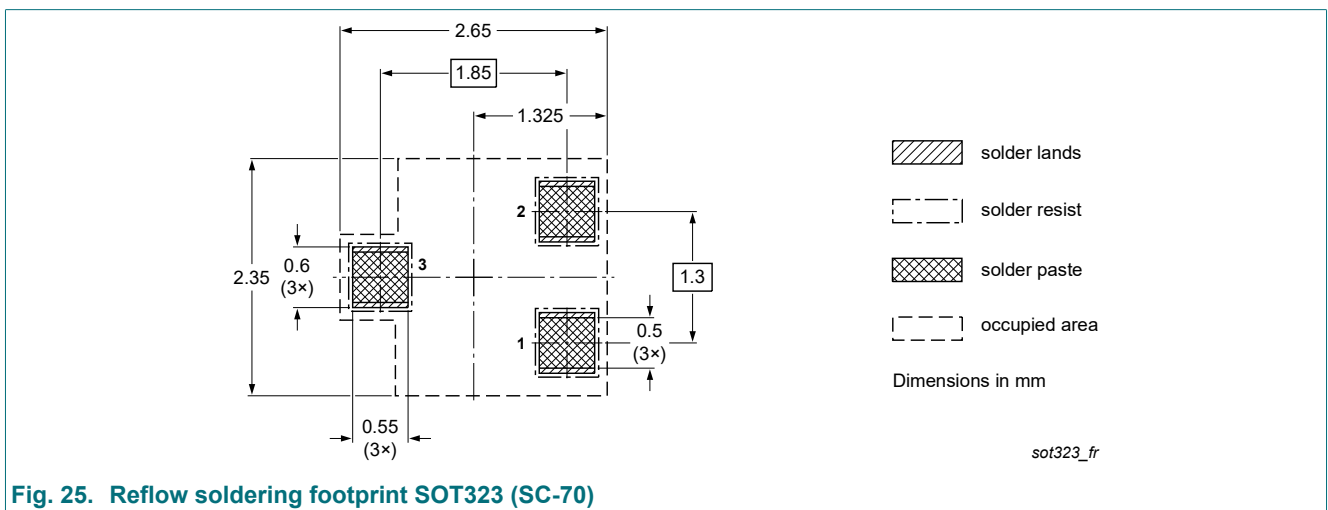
Reflow soldering footprint SOT323 (SC-70)
